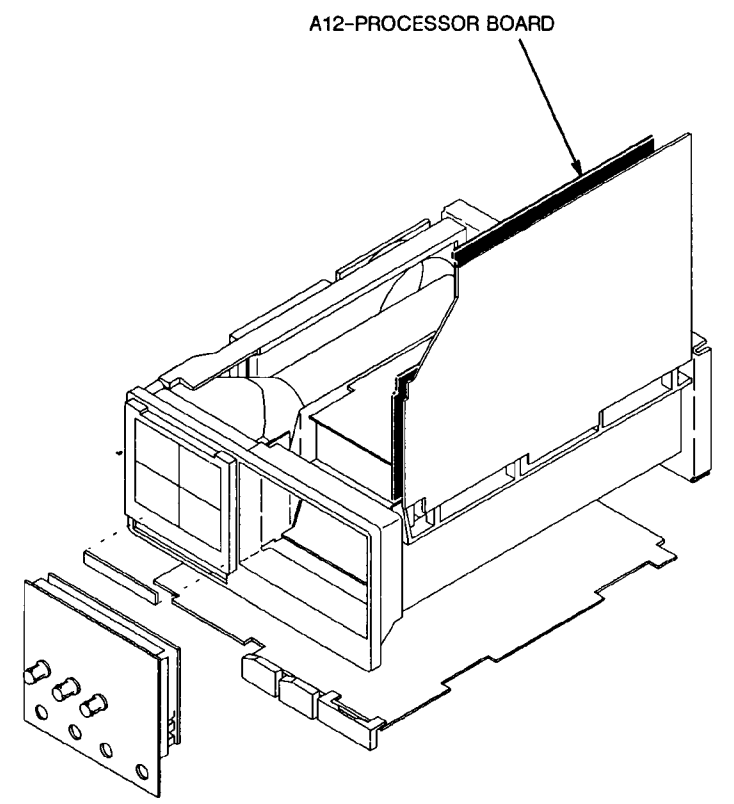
A12 Processor Board Component Locator (Sheet 1 of 2)
